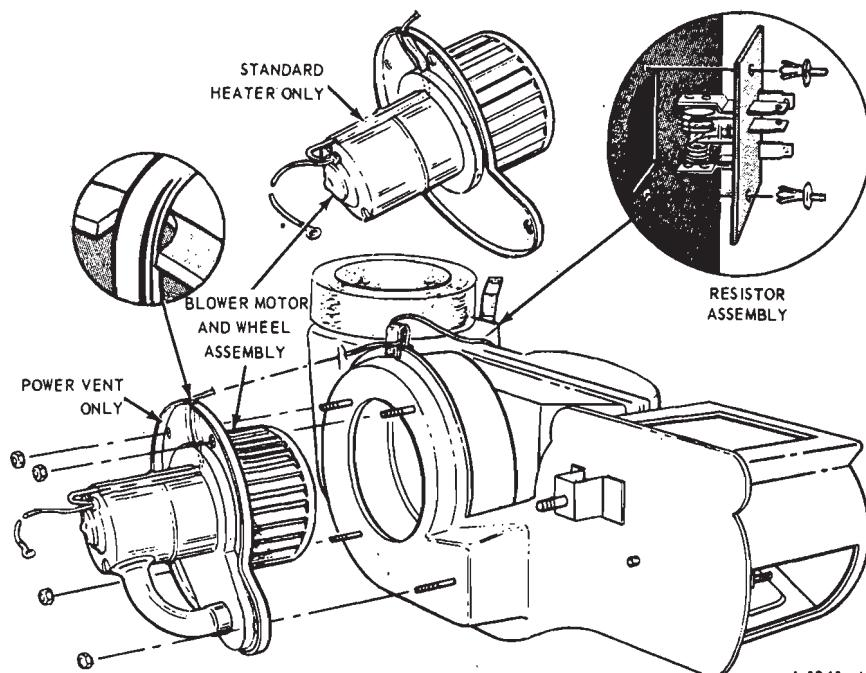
Heater Blower and Motor Installation—Mustang and Cougar
